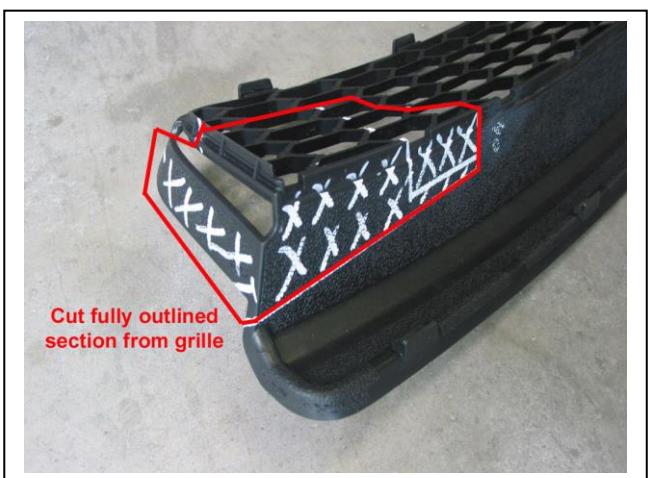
Grille trim. Use fins in grille as reference for cut distances.
